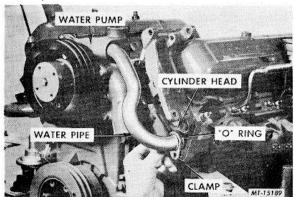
On V-392 engine the water pipe is removed from the water pump and crankcase.
